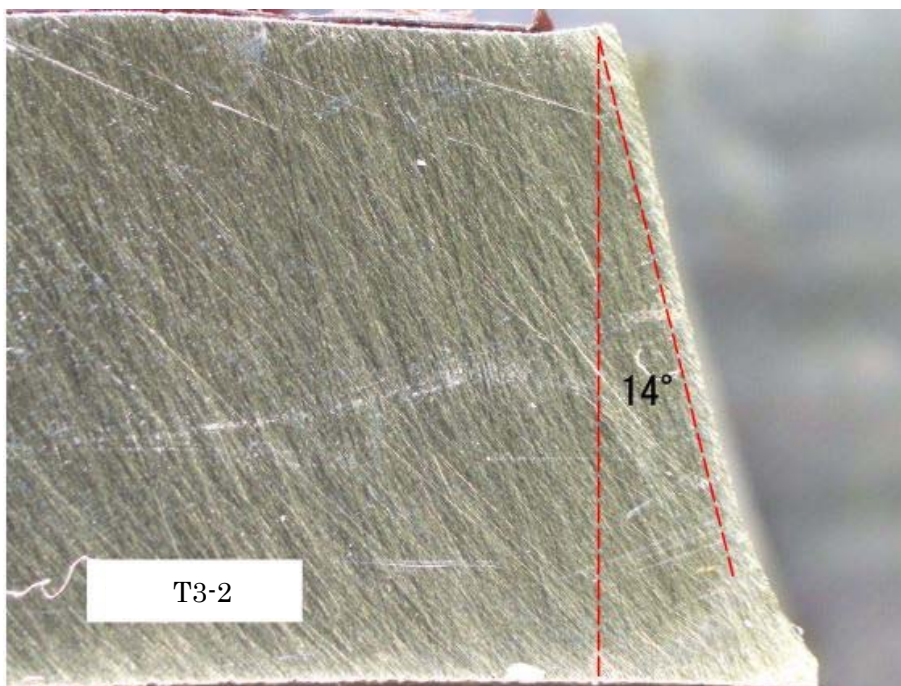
Cross-section of fracture specimen3 (T3-2).
